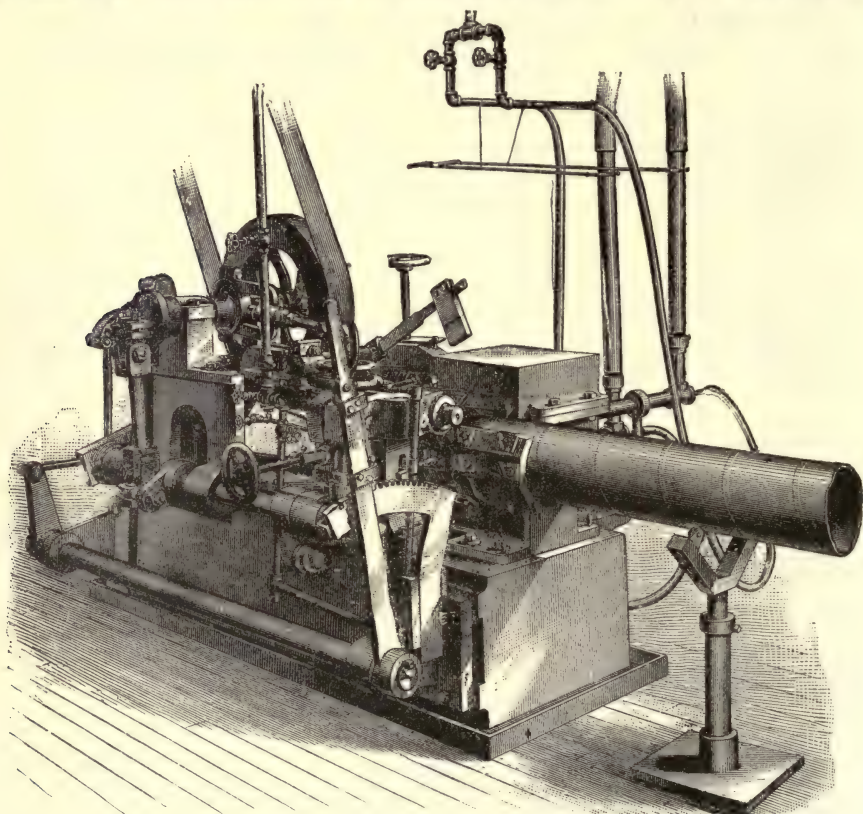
Manufacture of spirally welded tubing.
